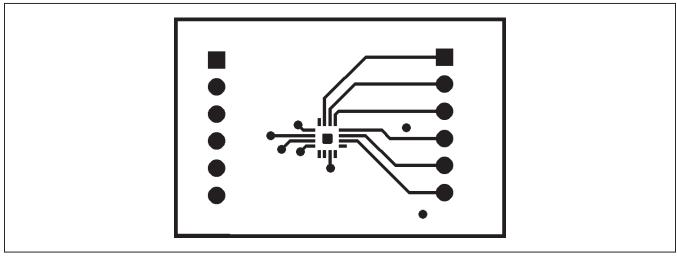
MAX5487PMB1 Peripheral Module PCB Layout—Component Side
